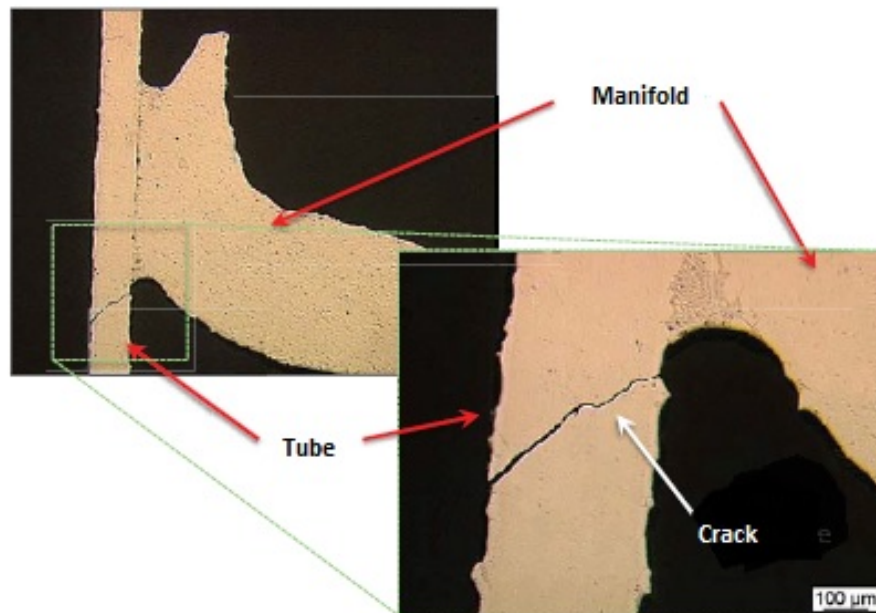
Fatigue crack located at the bottom of the tube, near the braze joint with the manifold in a charge air cooler.
